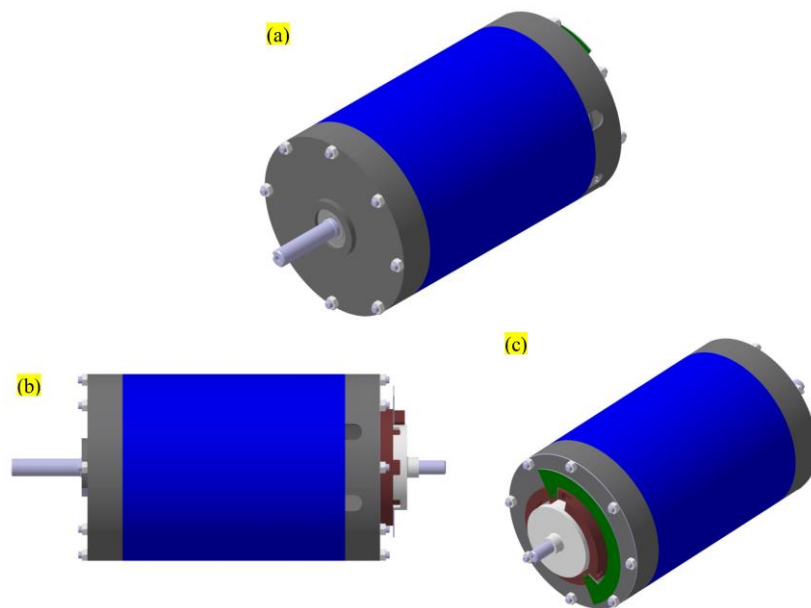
Views of the assembled SRM model (a) Isometric view (front) (b) Right side view (c) Isometric view (Rear)
